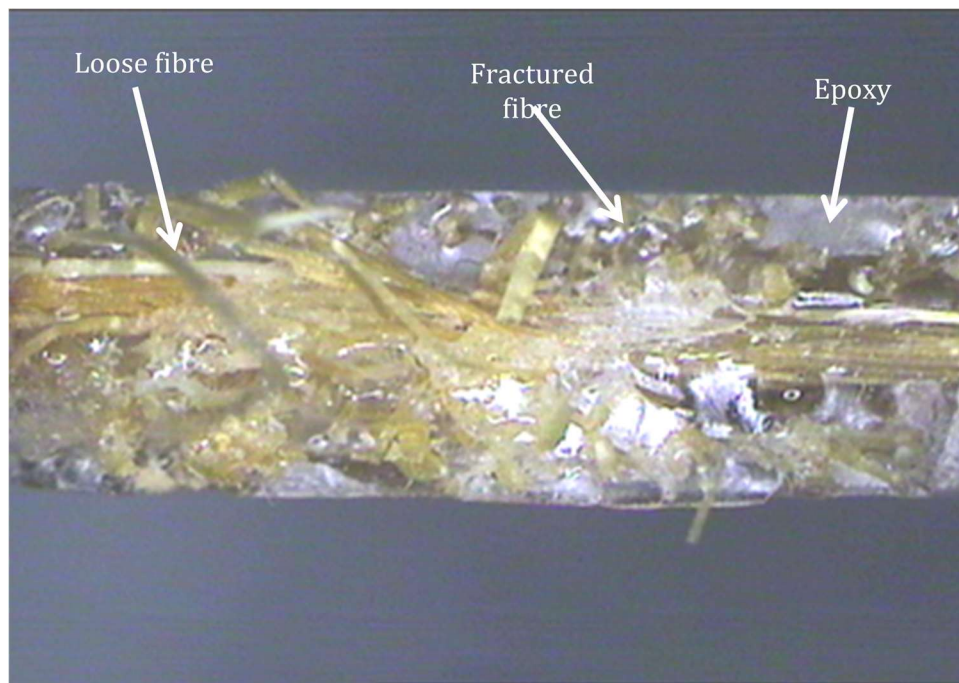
Macroscopic images of fractured specimen of sisal epoxy composite
